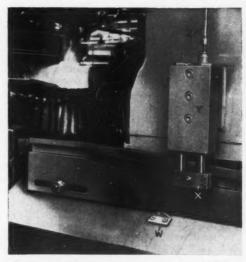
The cam on the machine bed, and the follower on the cutter head ram of the specially built Cincinnati Hydrotel milling machine, which control the speed of rotation of the work-table, to maintain a constant feed rate, regardless of the radius at which cutting is being performed
